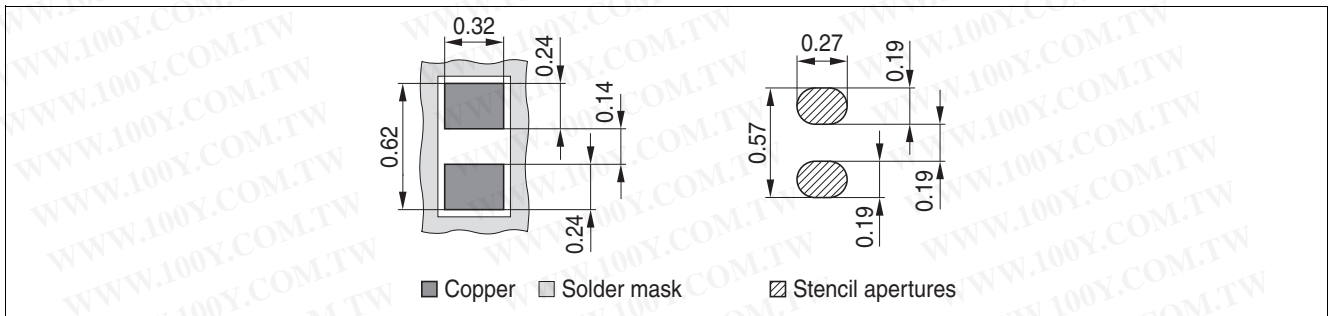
WLL-2-1 Footprint (dimension in mm)
